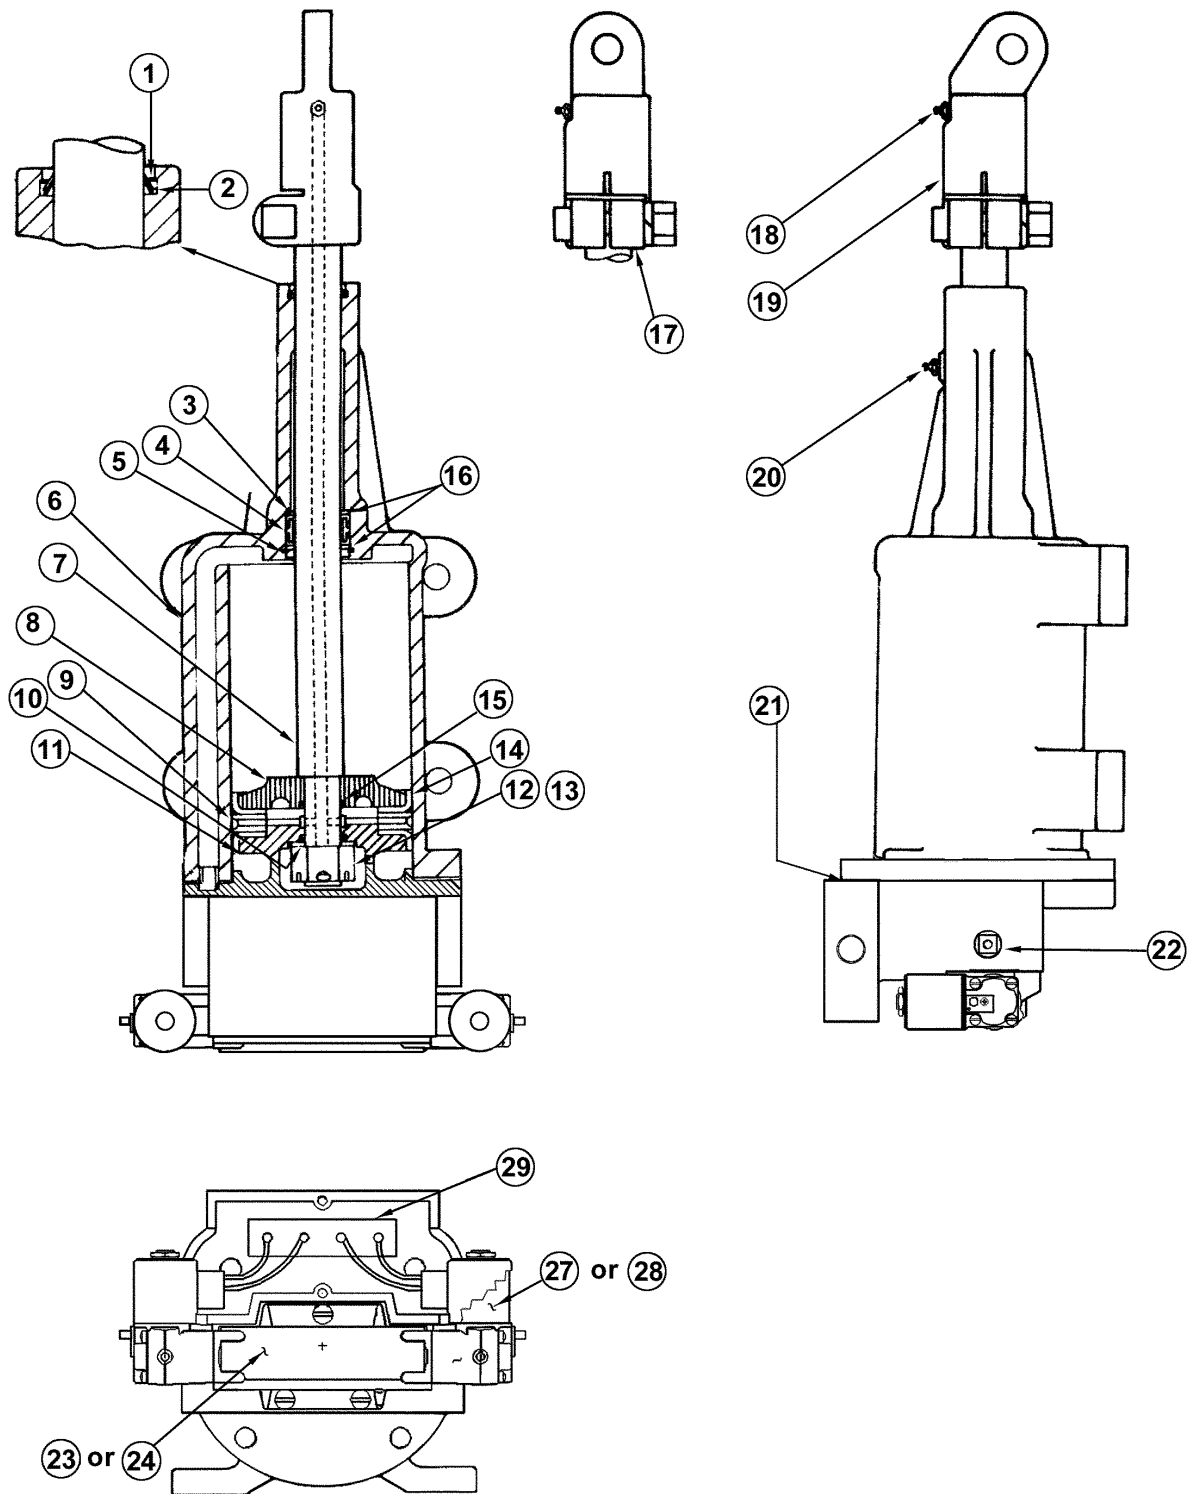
Style DA-10 Switch Machine Assembly Drawing
